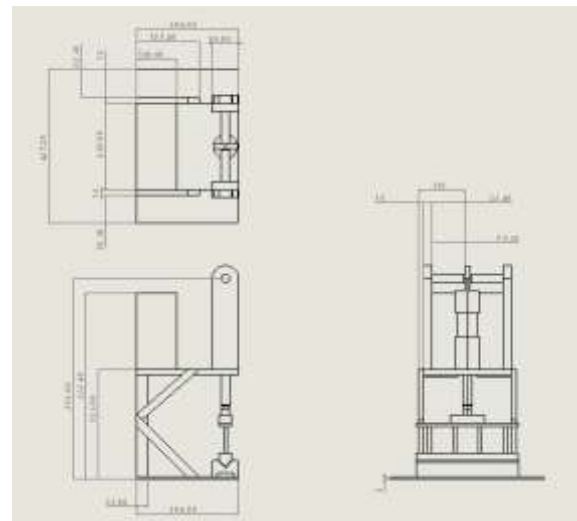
Drafting Assembly Views of Mini Hydraulic press Machine
